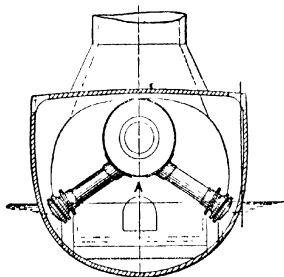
TRANSVERSE SECTION THROUGH THE FORWARD STOKES-HOLD, SHOWING THE BOILER.
